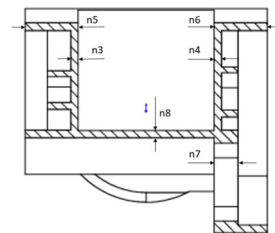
Six Design Parameters of the A-Axis Support (Frontal Section View)
